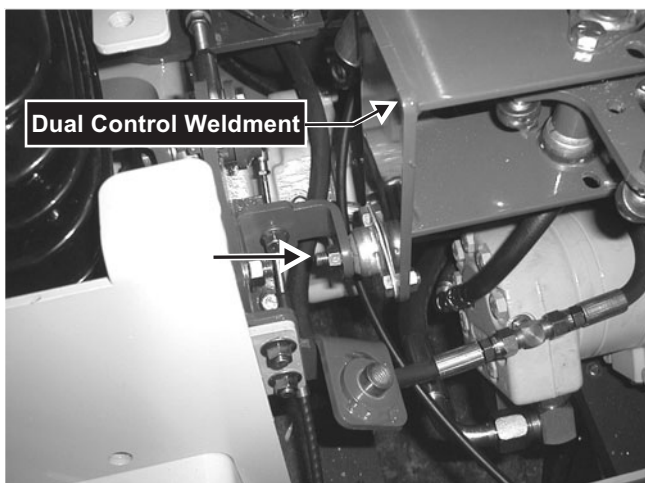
Location of capscrew, spacer and locknut securing dual control weldment on lower right side.
